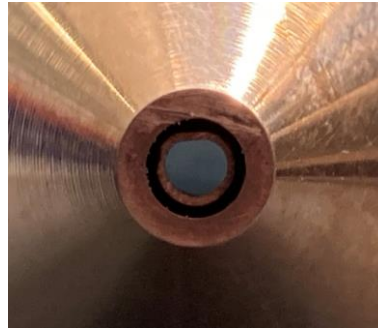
Deformity of the nozzle found after experimentation, most likely caused during assembly of the nozzle in the BeAM assembly.
